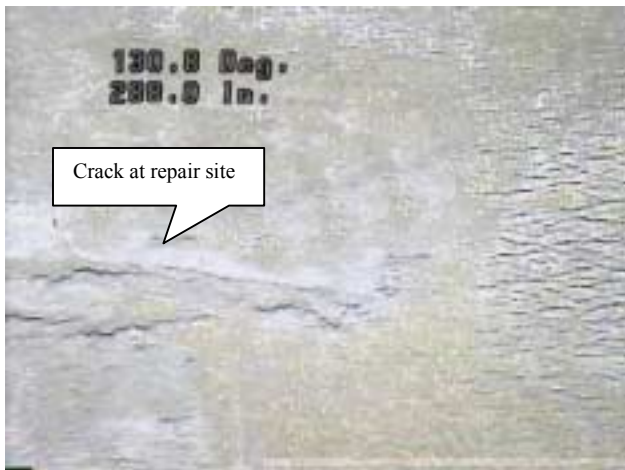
shows cracking initiated at a repair site and propagating in the repair and the original weld. The repairs in this image are one year old. Crack initiation in these conditions could be due to non-relevant indications in the repair area, incomplete removal of the original repair indication or metallurgical alteration from excessive thermal input during the repair welding process.
